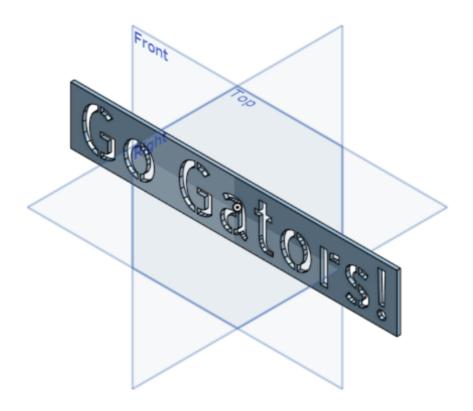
Isometric Onshape Drawing of Stencil 1 "Go Gators!" design
